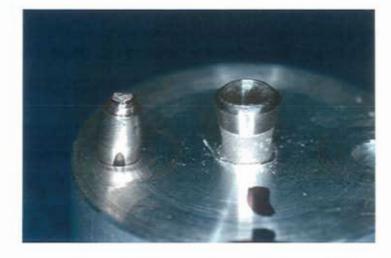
Abutment fracture (Ihdedental #3).
